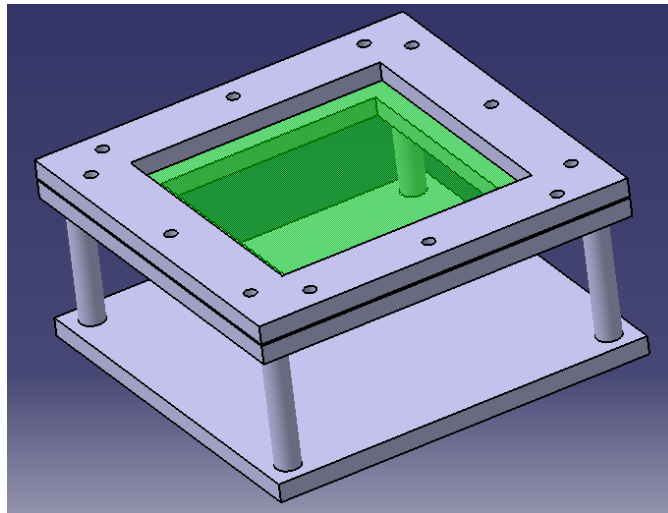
The CAD design of complete fixture with fastened sheet on CATIA
